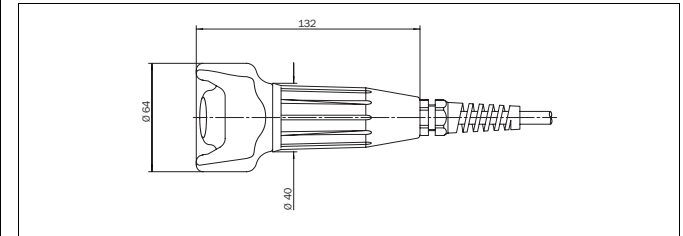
Dimensional drawing E100-A (enabling switch Standard)
